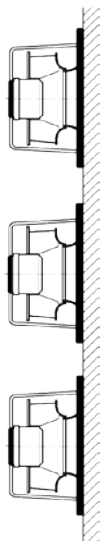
Example of FanGrid installation with RadiPac with support bracket.
